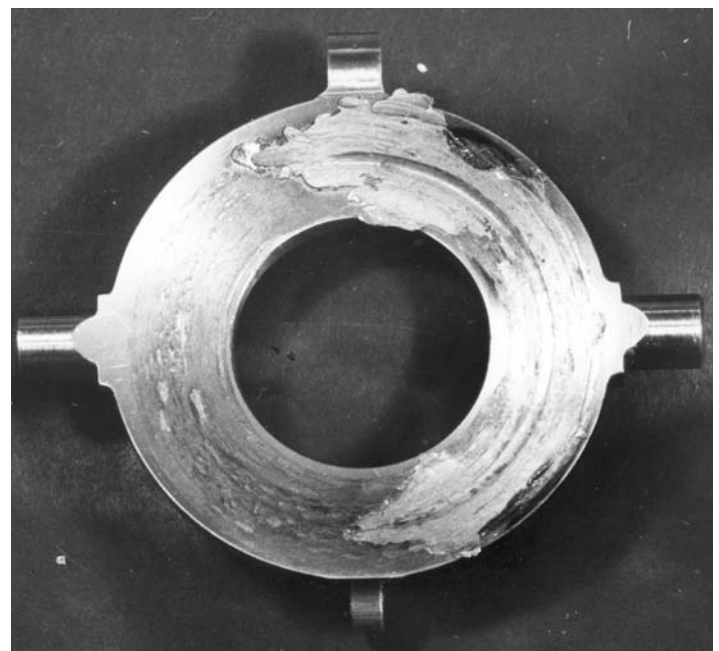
Cam plate showing adhesion of copper from the slipper pads
